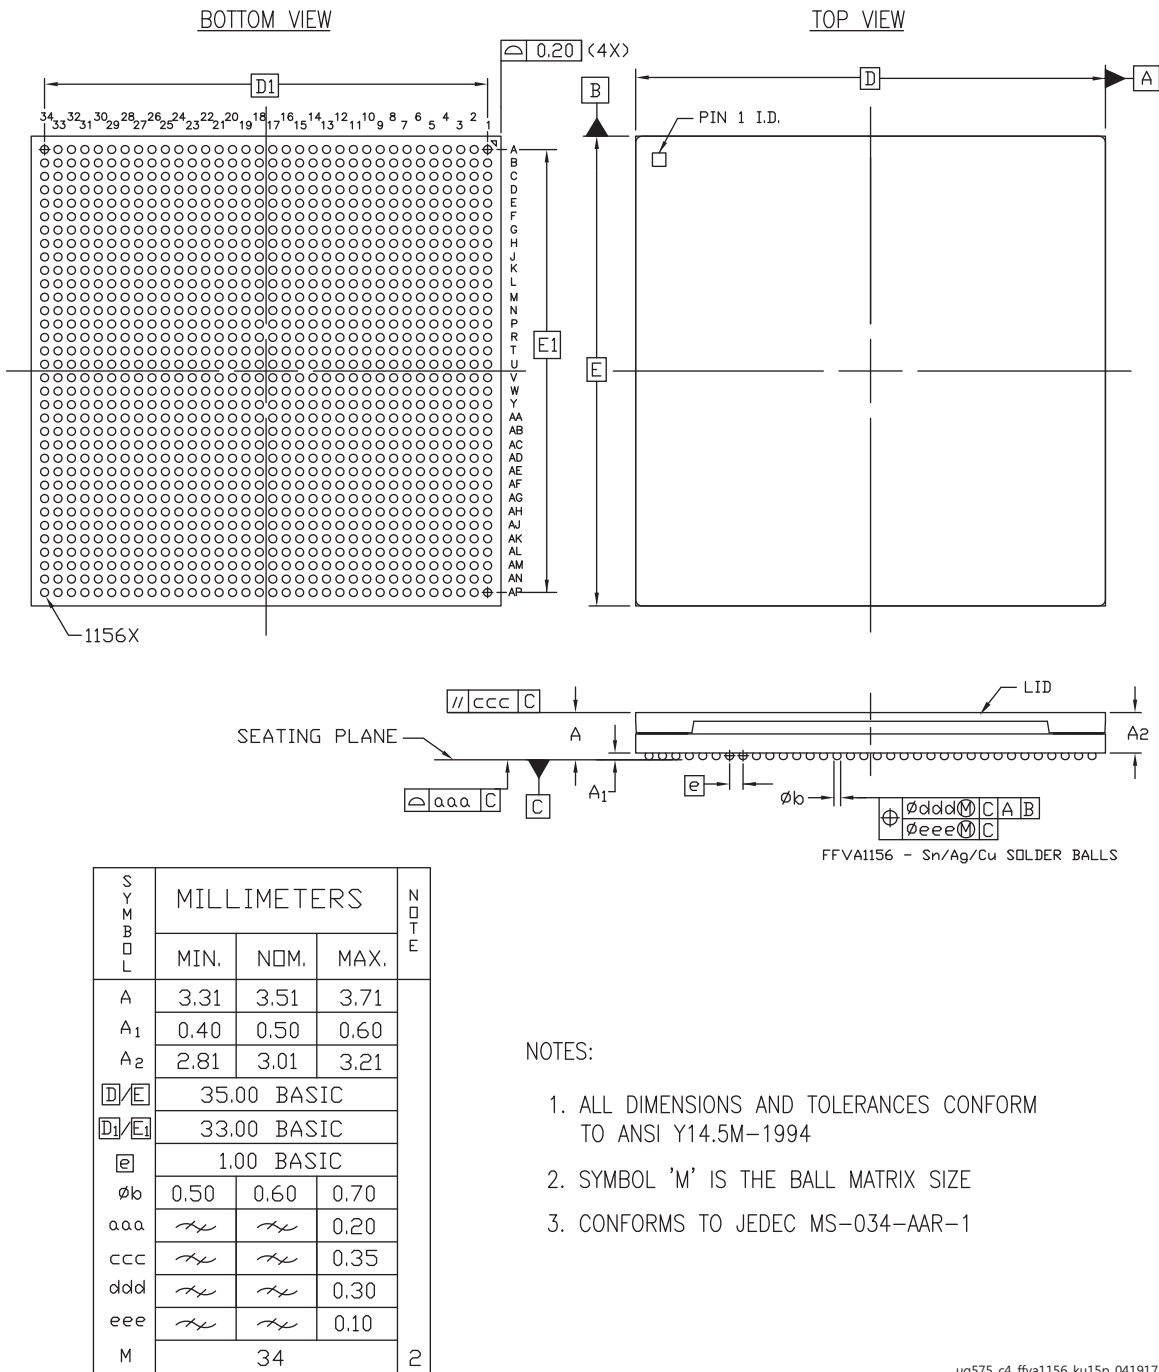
Package Dimensions for FFVA1156 (XCKU15P)
